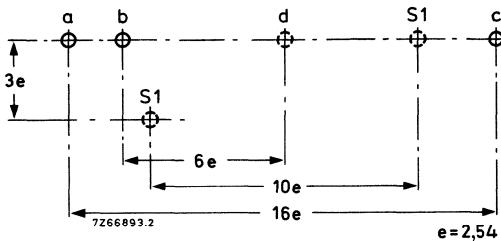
Hole pattern in the printed-wiring board for a single potentiometer (viewed on component side).
